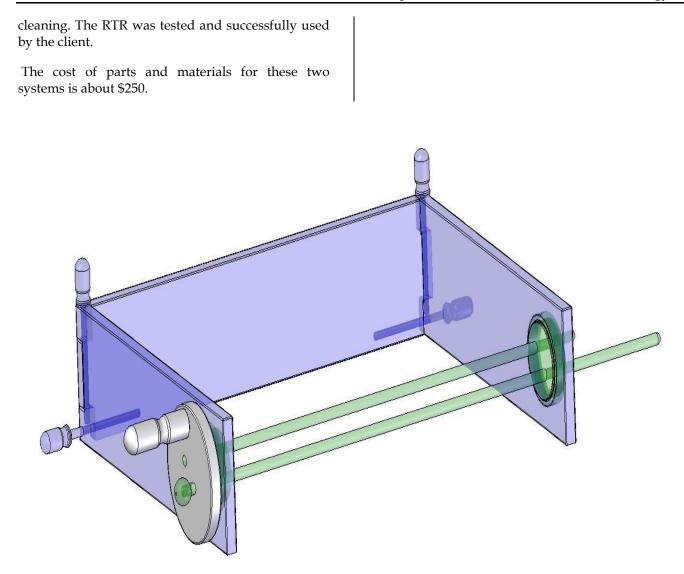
CAD drawing of the final Ready to Roll (RTR) design.
